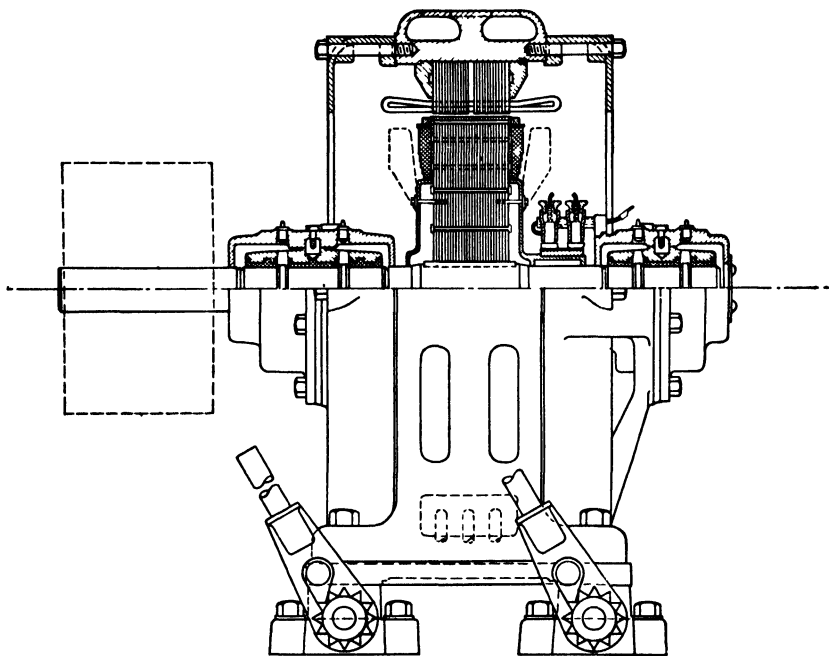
Assembly drawing of 115-hp., 1200-r.p.m., bracket-type synchronous motor.
